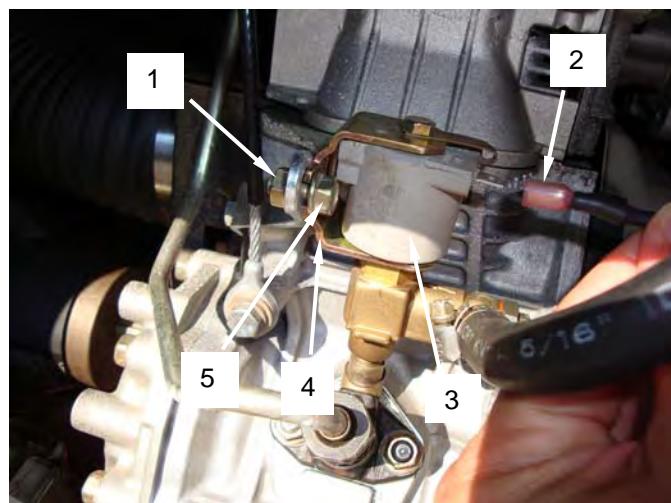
Removing Solenoid Wire and Bolt Securing Solenoid Bracket.
